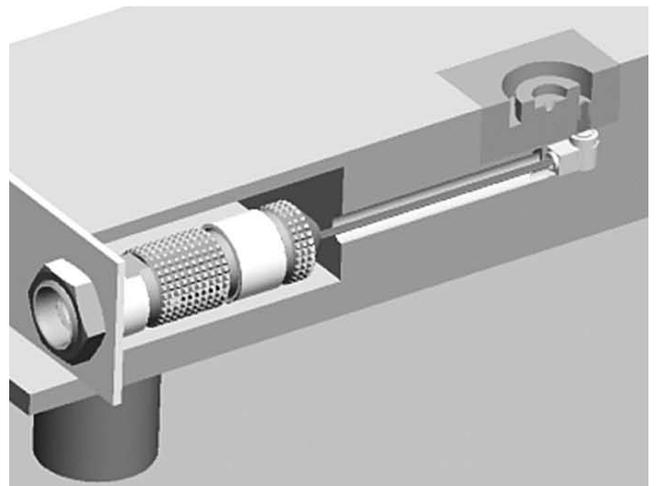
Installation with sensor, measurement pin, cable, connector and mounting plate
